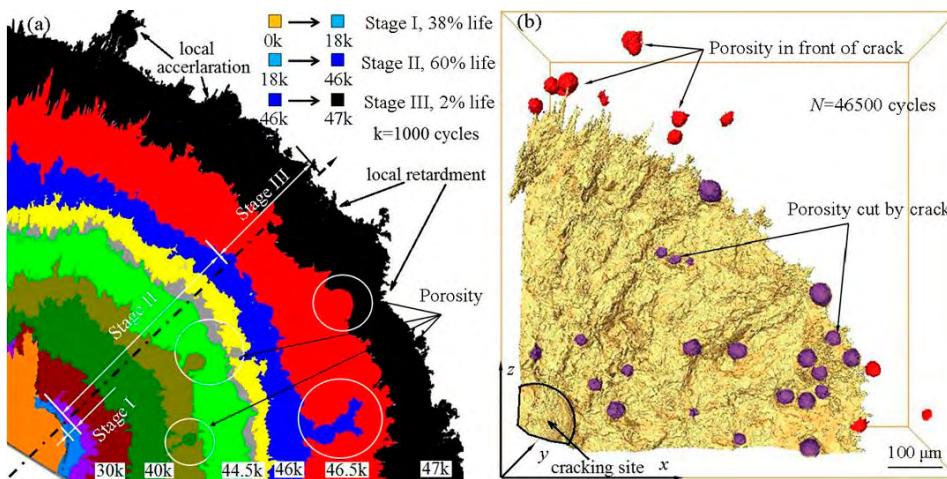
Analysis of fatigue crack propagation in a AA7020-T651 aluminum alloy specimen welded with hybrid laser: (a) advancement of the indicated crack front in different colors, (b) 3D rendering of the fatigue crack using CT scan images [29].
